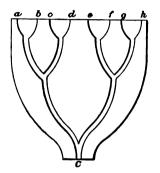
Young and Delcambre composing machine; diagram of guide-plate.
